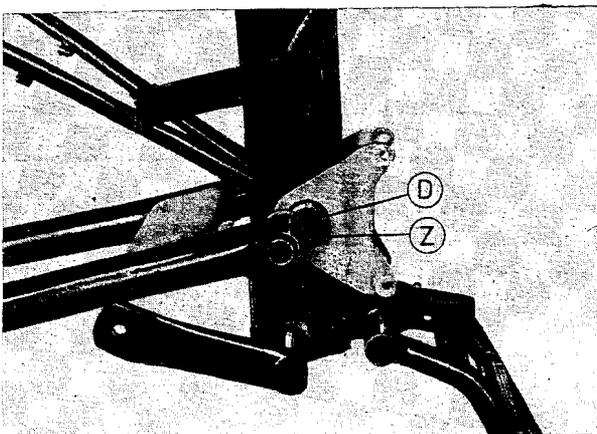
Engine shoes axially compressed by pressure ring (D) and tie rod (Z) with thread M6, rear-wheel swing-fork pushed in place
